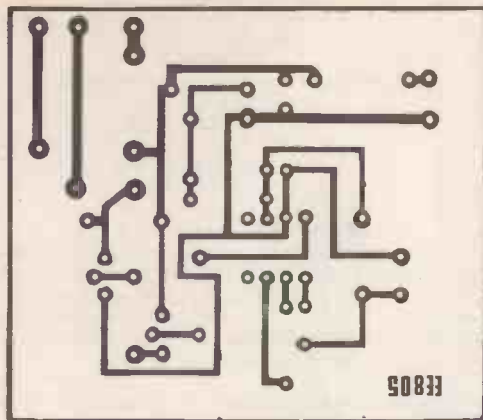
P.C.B. layout and wiring for the Whistle Switch.
